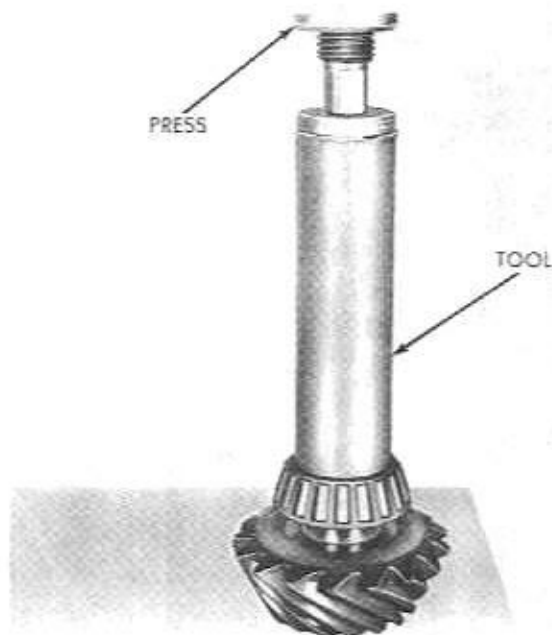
Installing Drive Pinion Rear Bearing Cone
